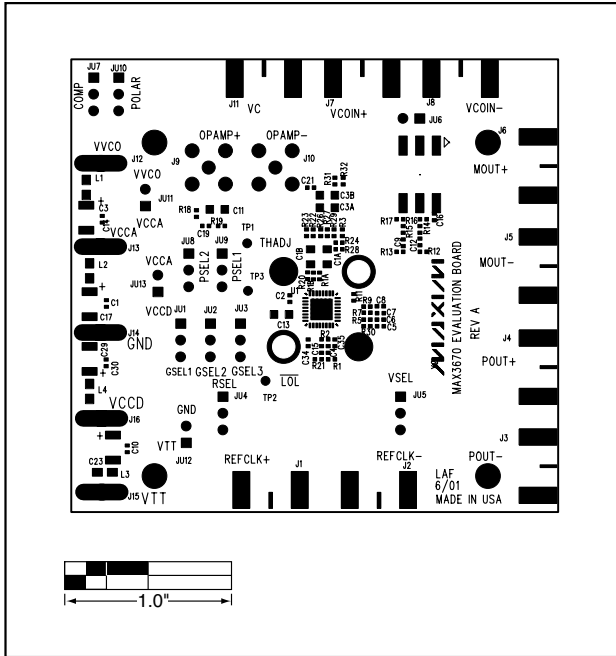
MAX3670 EV Kit Component Placement Guide—Component Side
